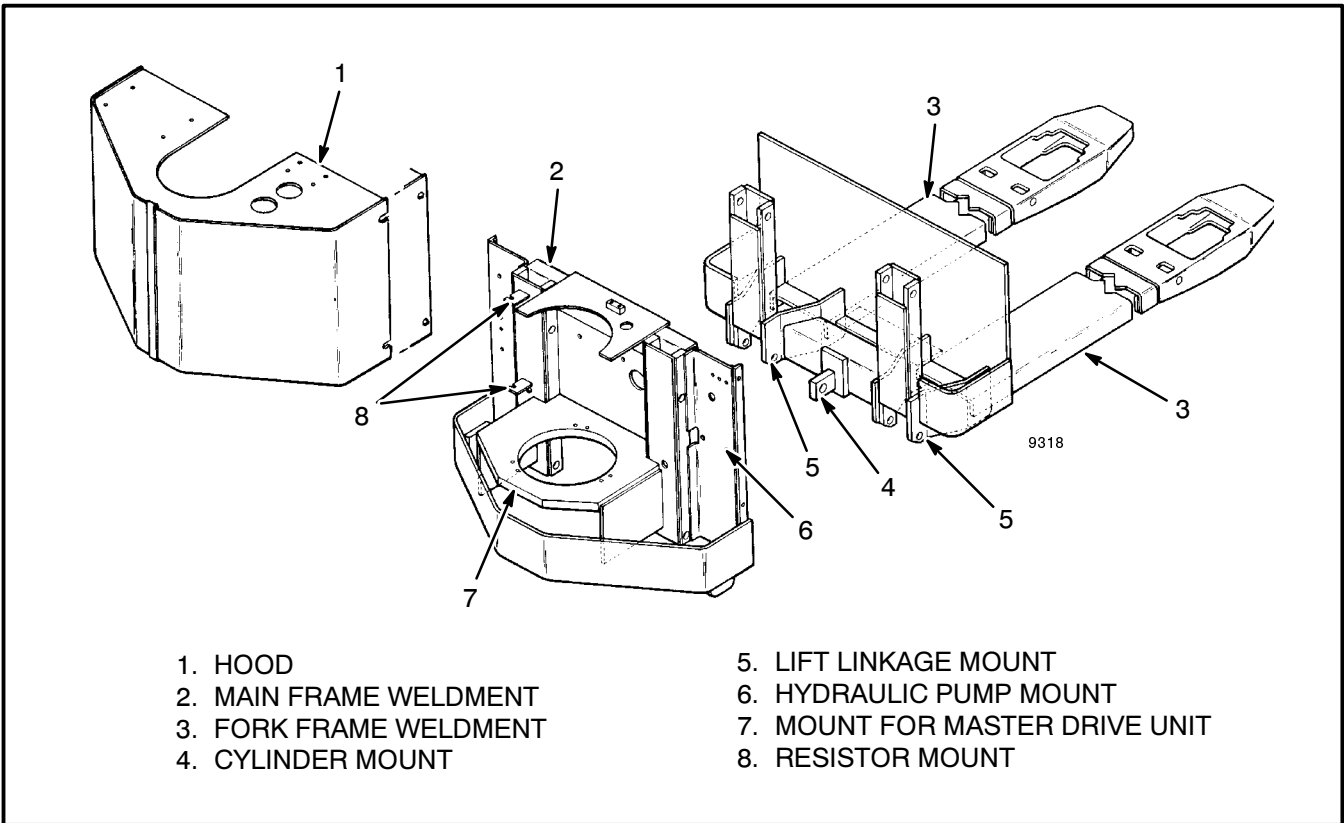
FRAME WELDMENT - W40-60XL, W40CL
